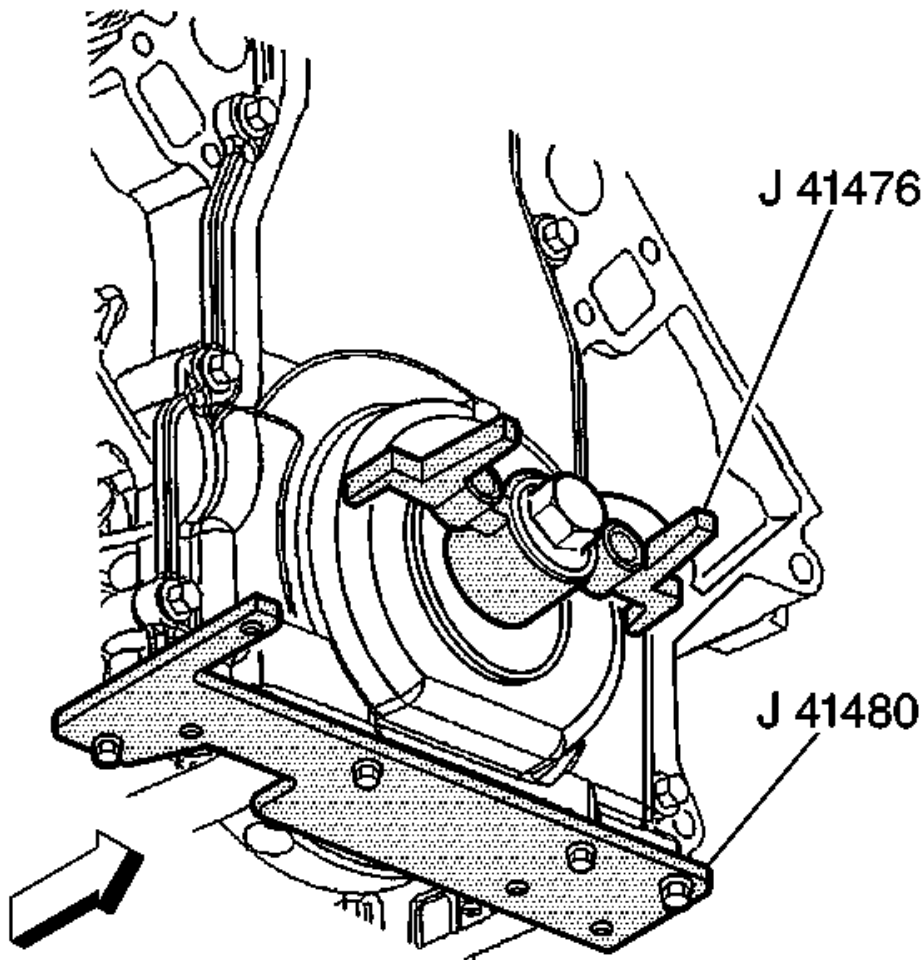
View Of J 41476 & J 41480 Installed On Engine
